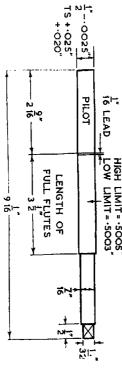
Dimensions of Pilot Reamer Used in Refitting Camshaft Bushes.
